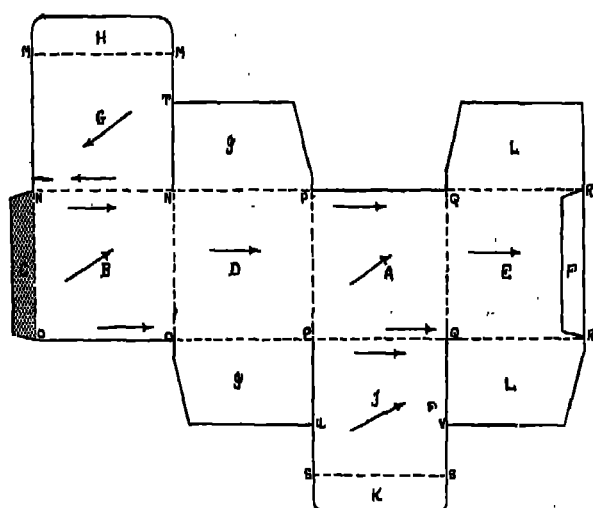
SINGLE-PIECE CUBICAL PACKET FOR SALE OF OFFICE ADHESIVE PASTE.
